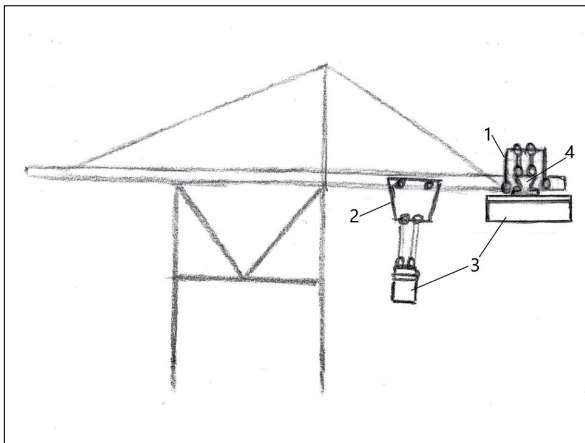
Concept 3. Simplified side view drawing. 1: upper trolley. 2: lower trolley. 3: container. 4: rotating headblock.
